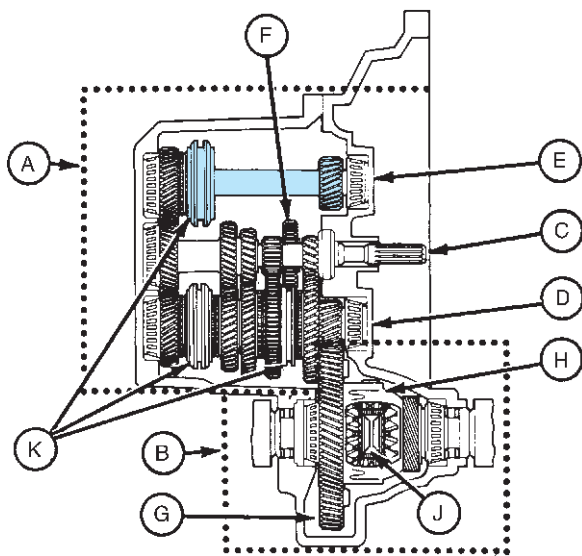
This transaxle mounts the fifth gear and fifth gear synchronizer assembly on a separate shaft (E) along with a final drive pinion gear. (Courtesy of Ford Motor Company)
